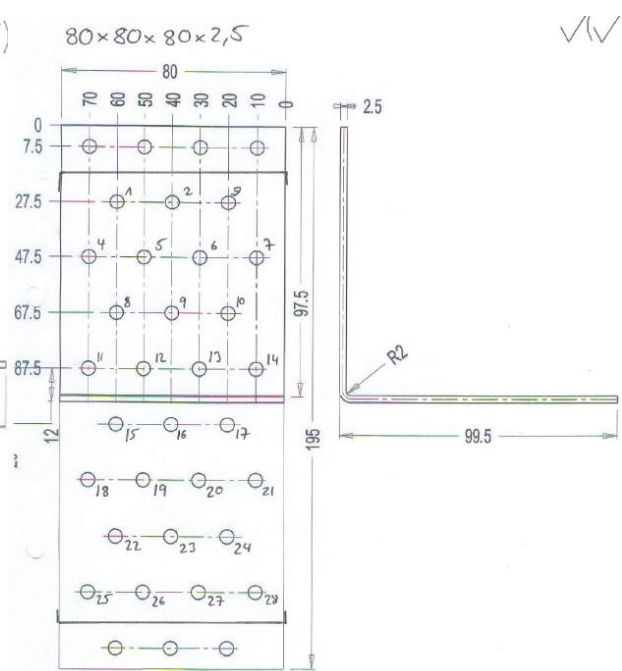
Dimensions of angle bracket 80x80x80x2,5
